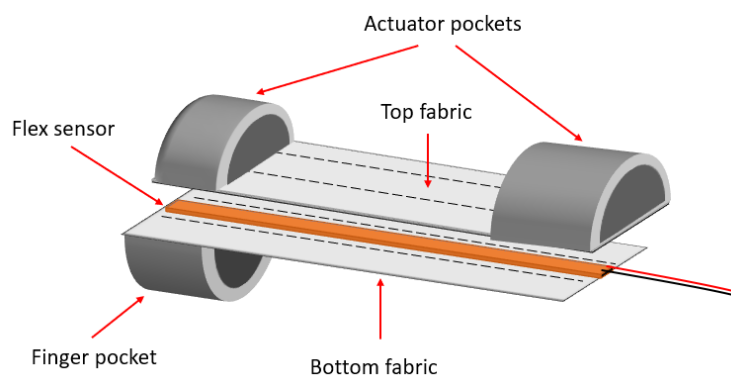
Exploded view of the finger sleeve for the McKibben actuator.
